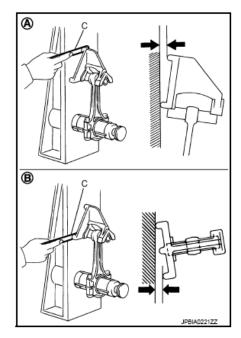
Checking Connecting Rod Bend And Torsion Using Connecting Rod Aligner Courtesy of NISSAN NORTH AMERICA, INC.
